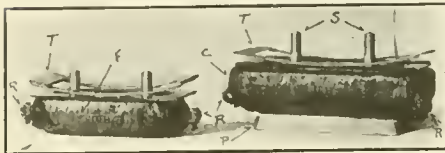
FIELD COILS AND POLES ASSEMBLED.
